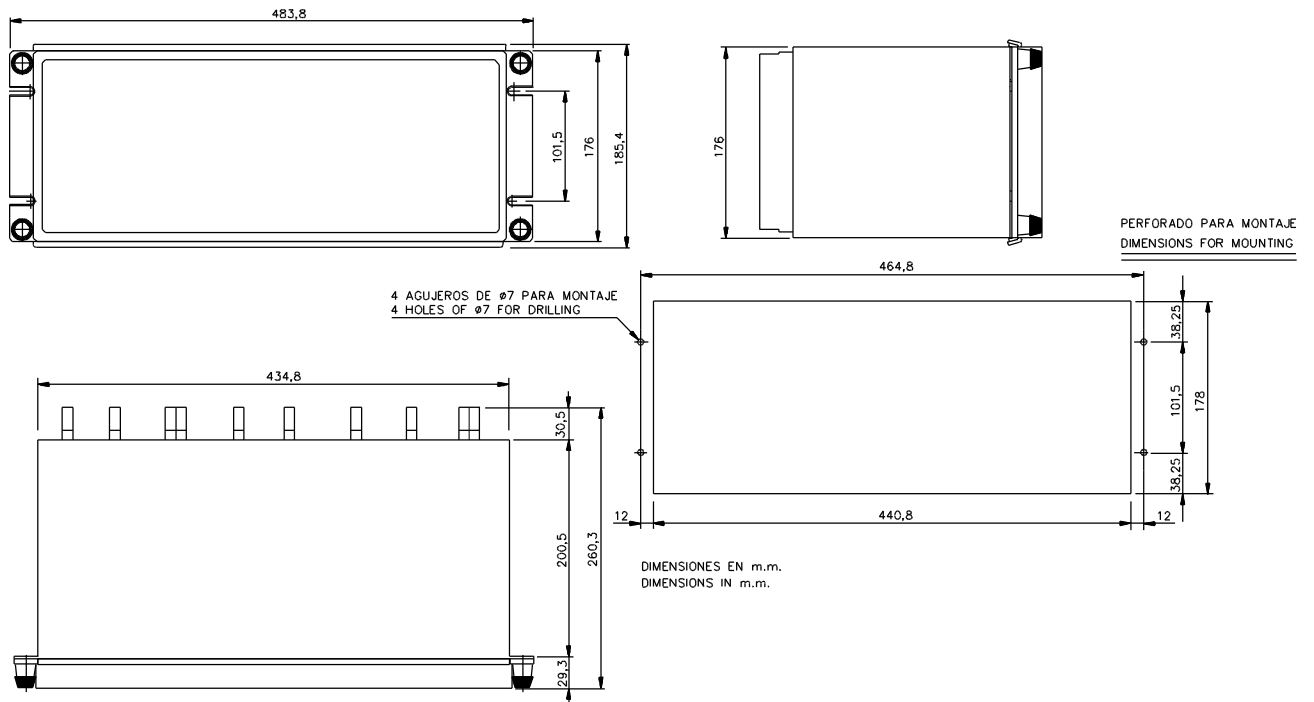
Dimensions and drilling (226B6086 Fig 3)
